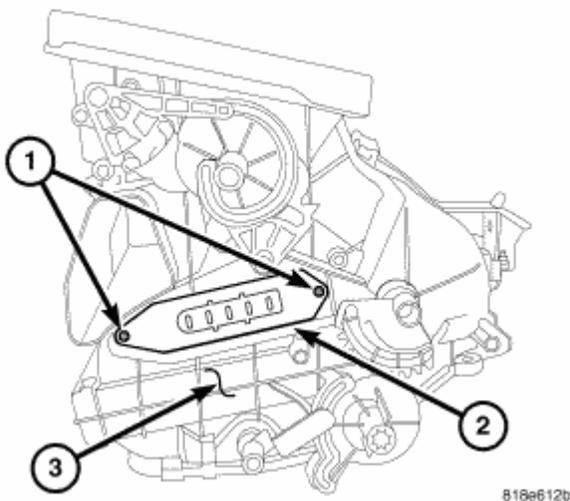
Removing/Installing Screws That Secure PTC Heater Unit To Air Distribution Housing
